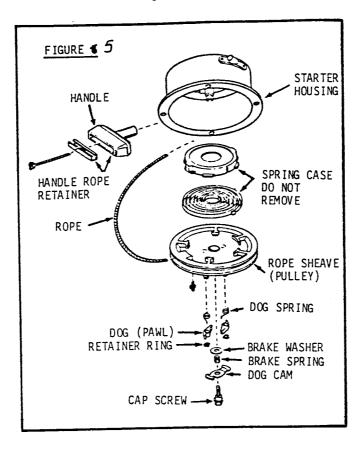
RETRACTABLE STARTER - DISASSEMBLED FOR ROPE REPLACEMENT
